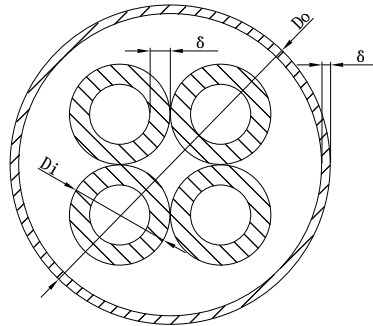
The cross-sectional view of the tube-in-tube condenser
